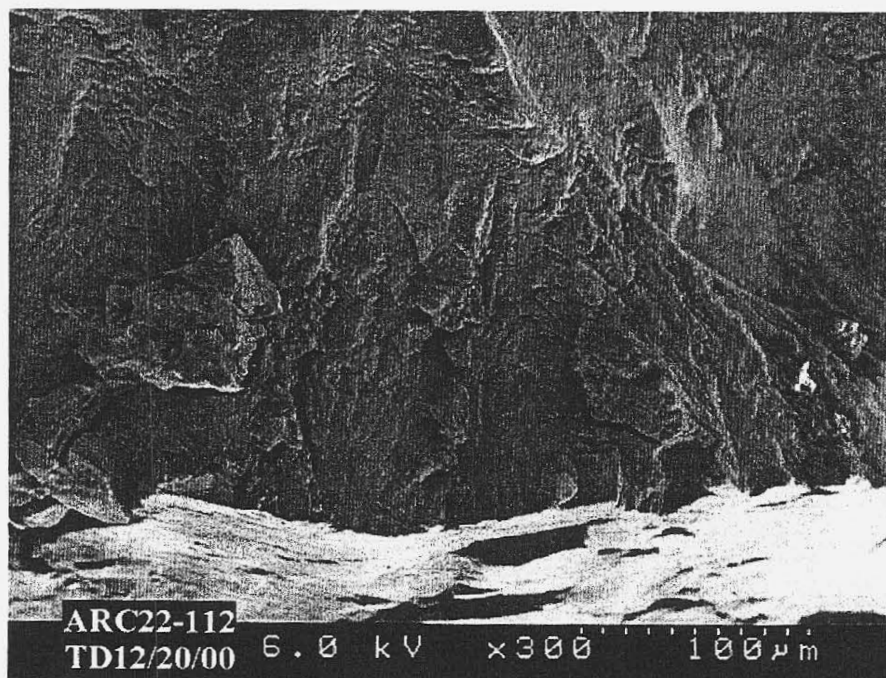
Fracture surface of specimen strained in SCW at 73°C and +0.4 V.
